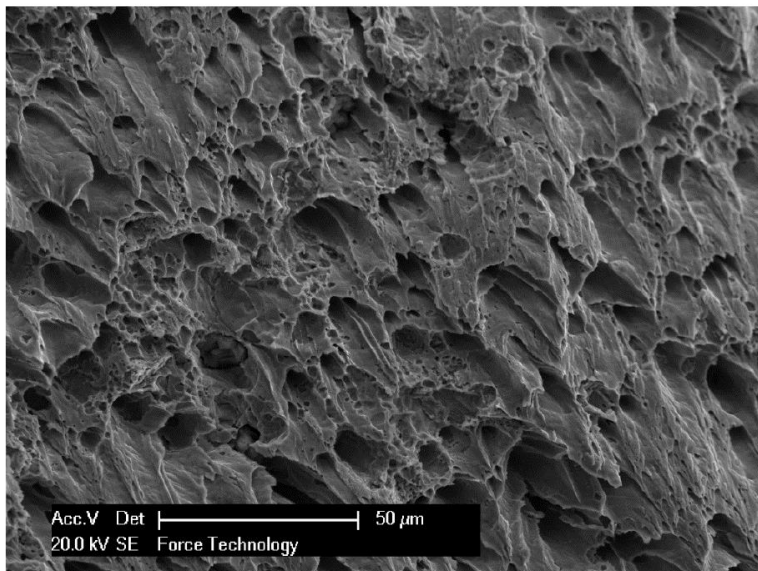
SEM micrograph of aft left hand steering rod fracture surface displaying ductile fracture confirmed by shear dimples.
